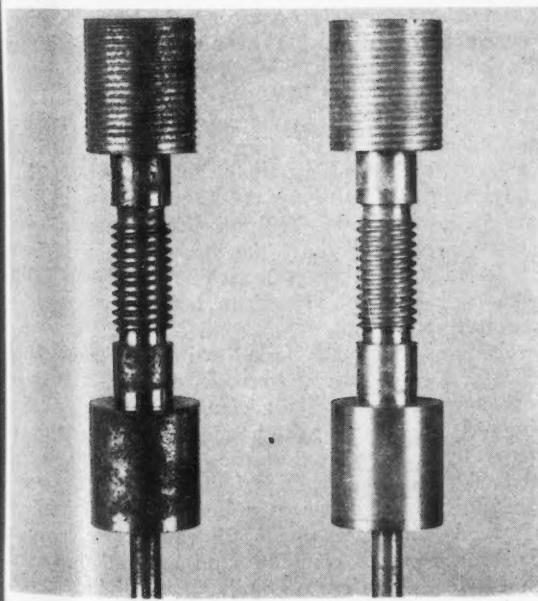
Special test rods for outdoor exposure tests. Top—Coarse machined. Center—Threaded. Bottom—Fine Machined.
